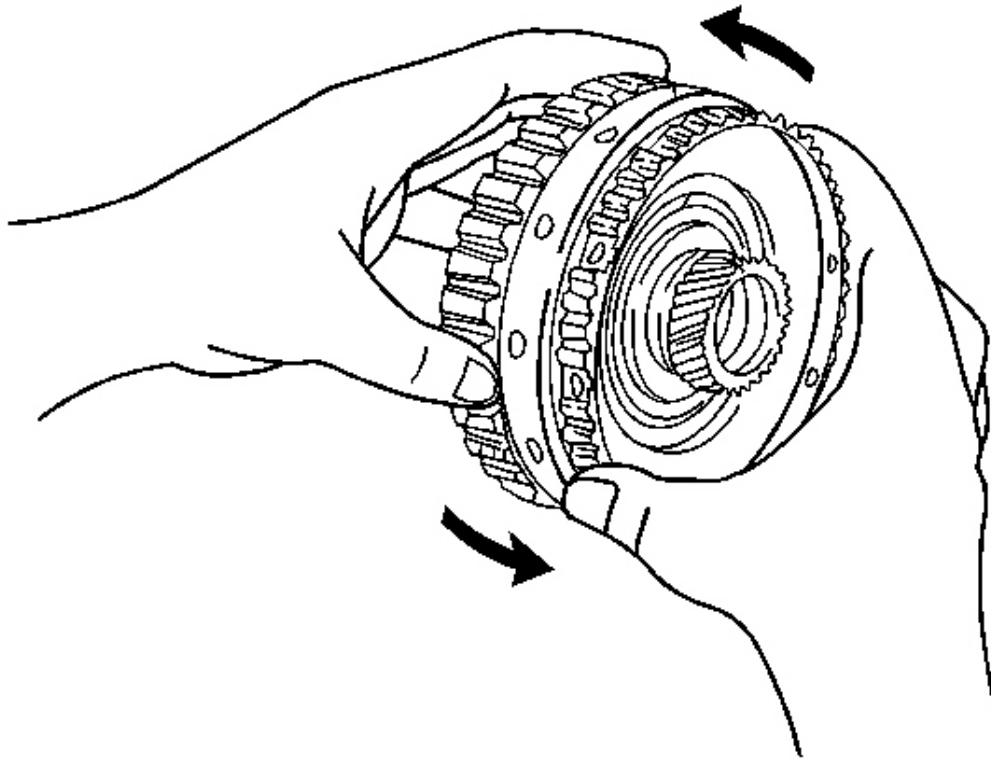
Turning Rear Planetary Sun Gear & One-Way Clutch
